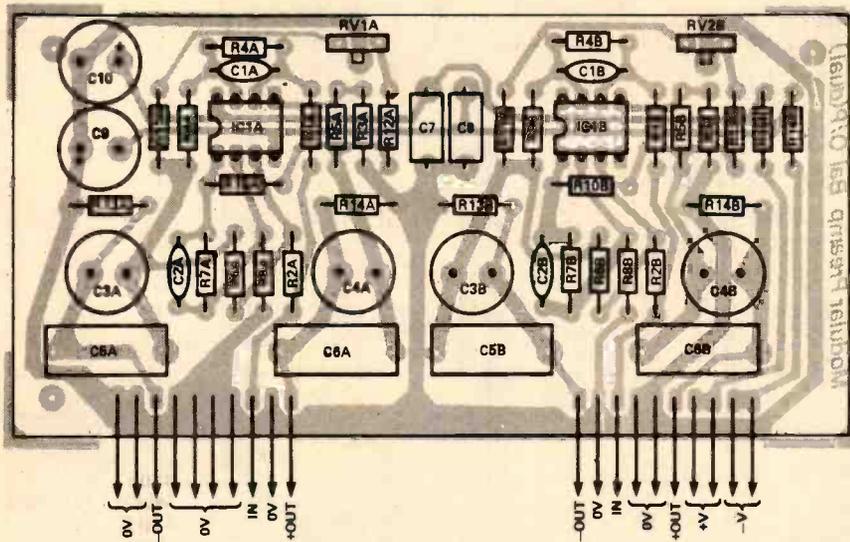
Overlay of the PCB for the balanced output driver — this is a stereo board, so only one is required, but note the components that you have to obtain two of.
